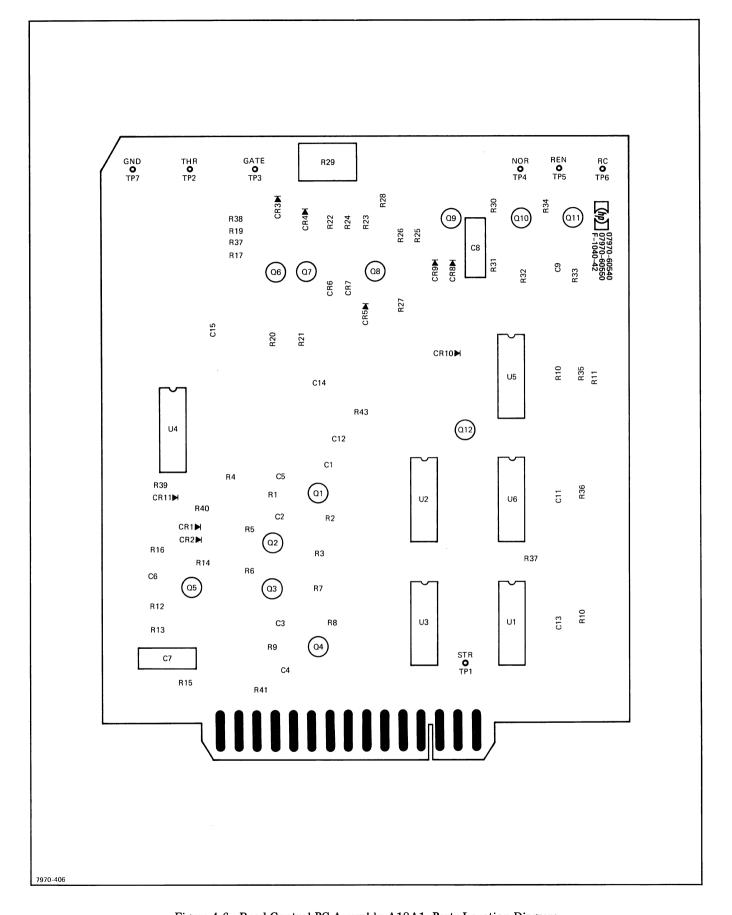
Read Control PC Assembly A18A1, Parts Location Diagram
